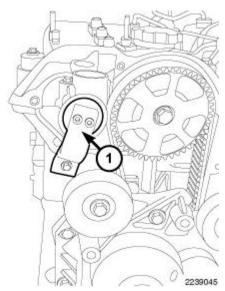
Camshaft Locking Tool Courtesy of CHRYSLER LLC
